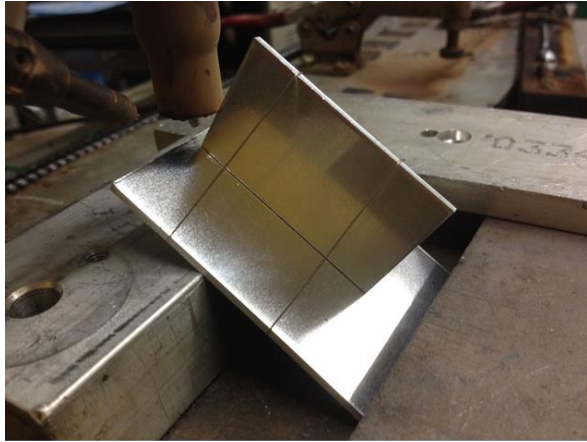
Thermocouple positions for TIG welding experiments
